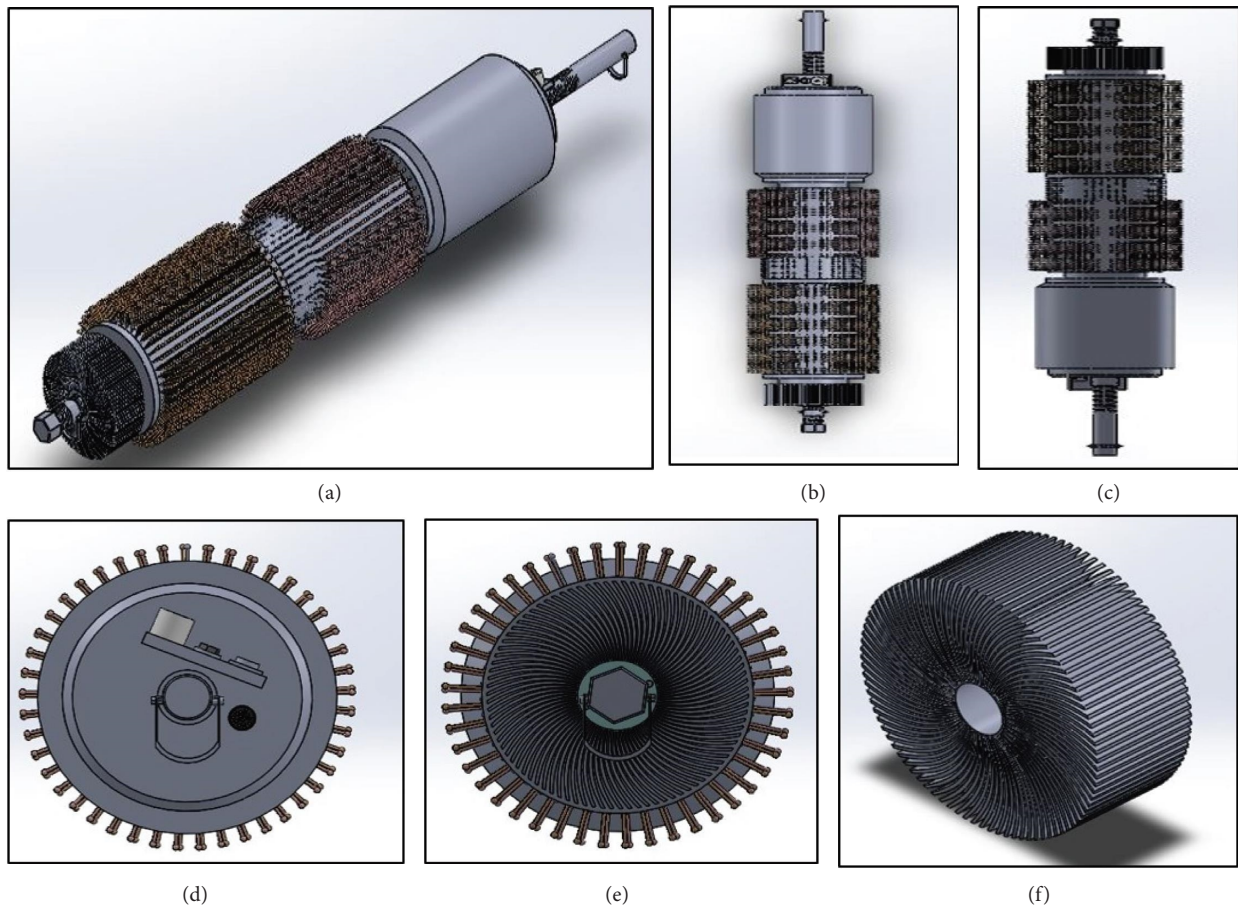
Brush design: (a–c) are assembled isometric and side views of brush, (d) front view, (e) back view, and (f) spiral brush isometric view. The system is equipped with a modified brush design to perform fine cleaning. The custom design of the brush helps CAICEM adapt to different pipelines.
